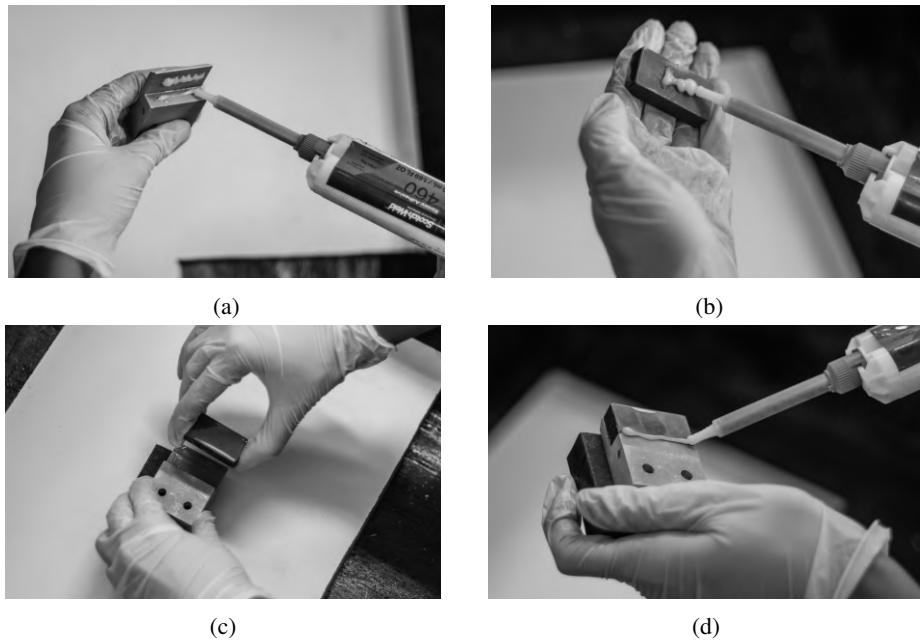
Side concentrator parts: (a) epoxy deposition at the aluminum; (b) epoxy deposition at the concentrator magnet; (c) assembly; (d) finishing process.
